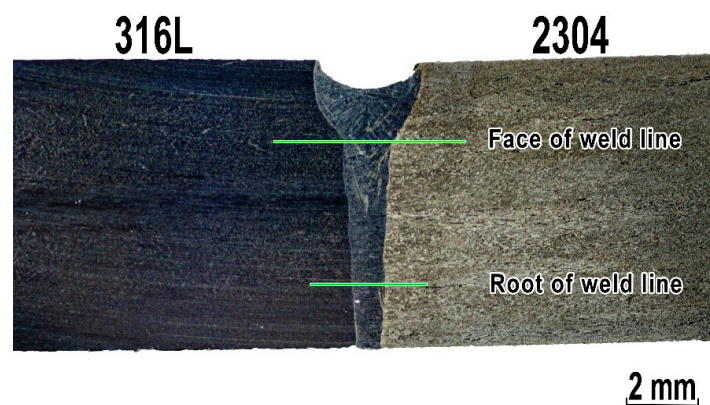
Cross-section of the 316L–2304 stainless steel welded joint. The arrangement of microhardness measurement points on the specimen is marked by lines.
